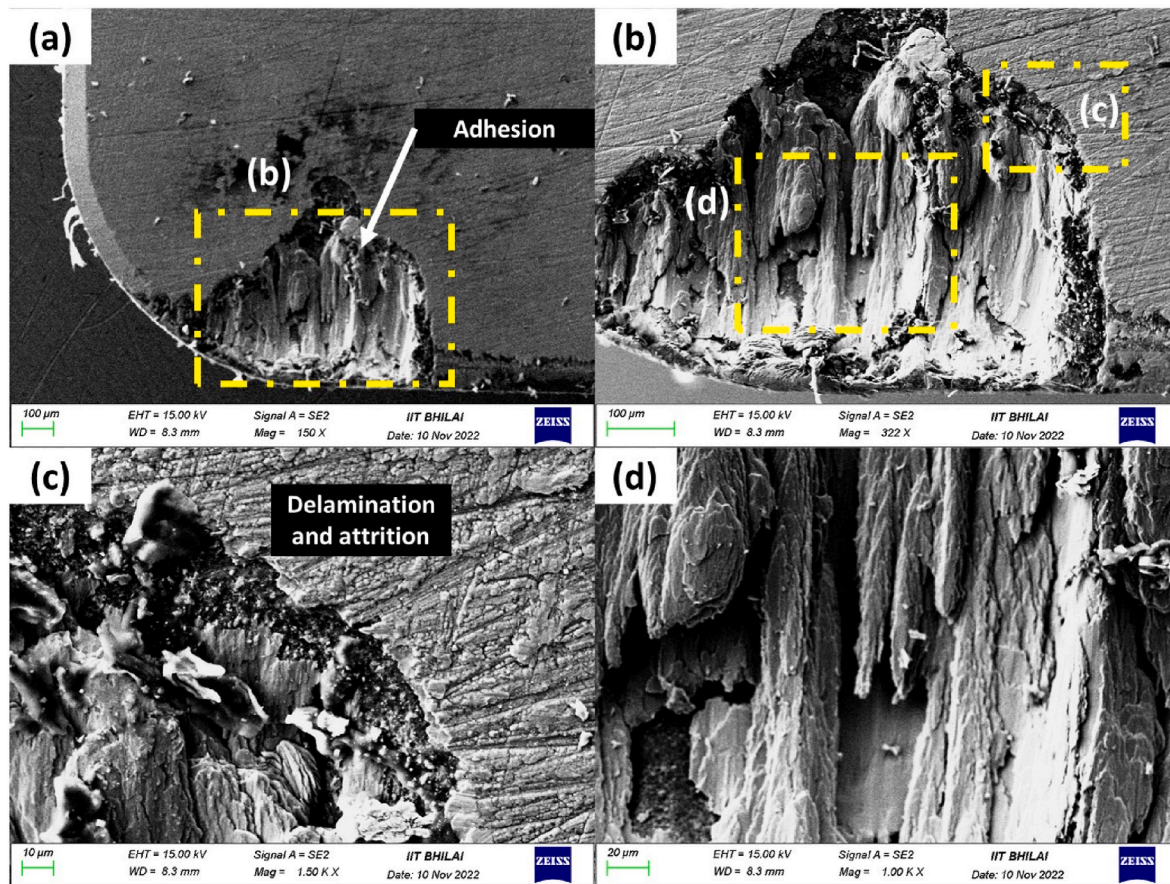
SEM micrographs of the wear on the rake face of TiSiVN coated tool after machining at 50 m/min cutting speed.
